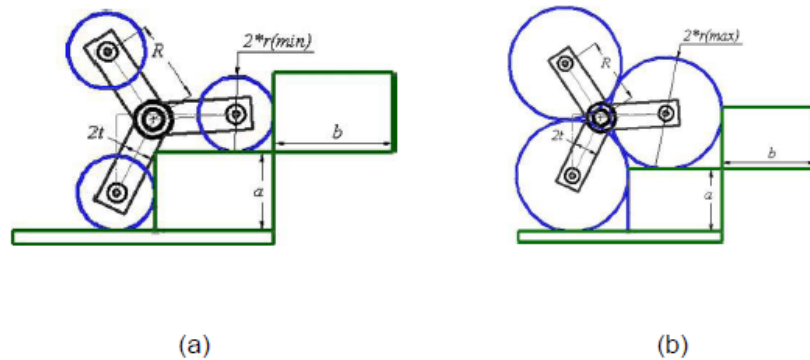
(a) Minimum radius of regular wheel, (b) Maximum radius of regular wheel
